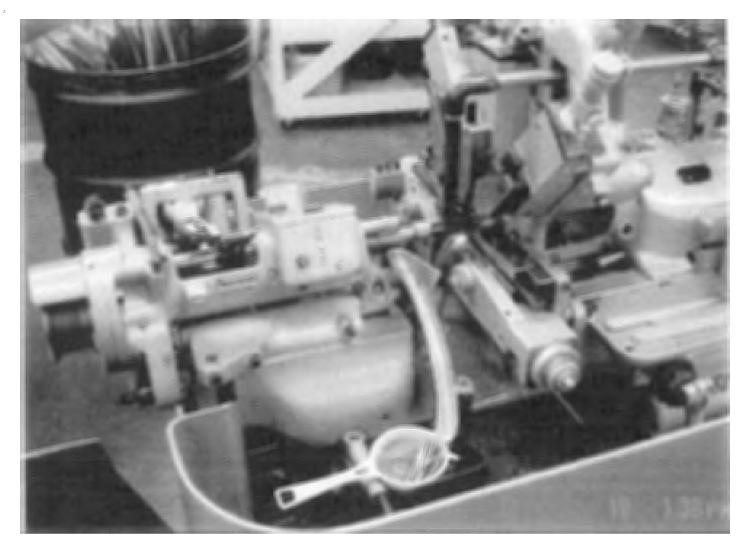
metal rods are automatically fed to the cutting end of the lathe where the final product and cutting fluid flow into a trough where the pins are collected. The machinist stands at the cutting end, but moves around throughout the machine shop to monitor the operation of the lathes and collect random samples for inspection to ensure proper operation of the lathes. Cutting fluid is used to aid the cutting process, to extend the life of the cutting tools and to control and contain the release of dusts.
